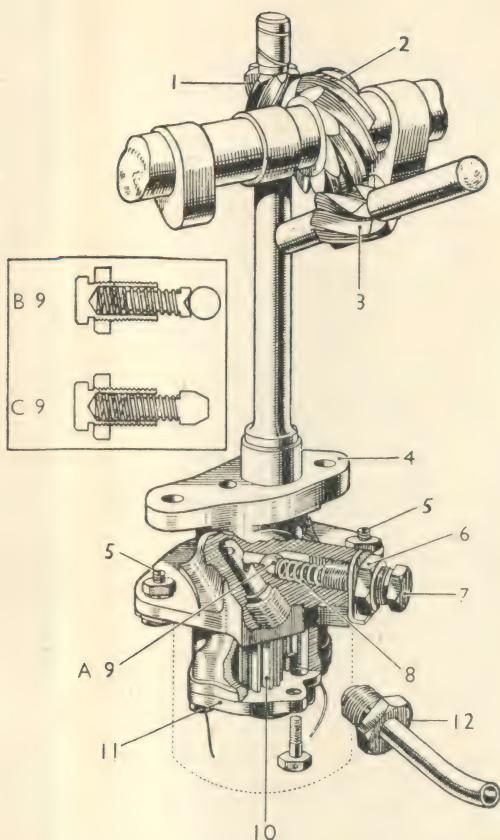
VAUXHALL (BEDFORD) OIL PUMP AND DRIVE
